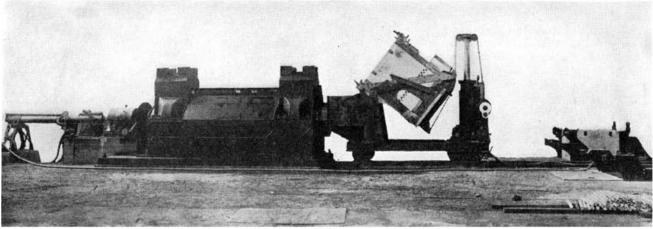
Medium centrifugal casting machine with furnace in pouring position. Driving motor and push-out ram at left
